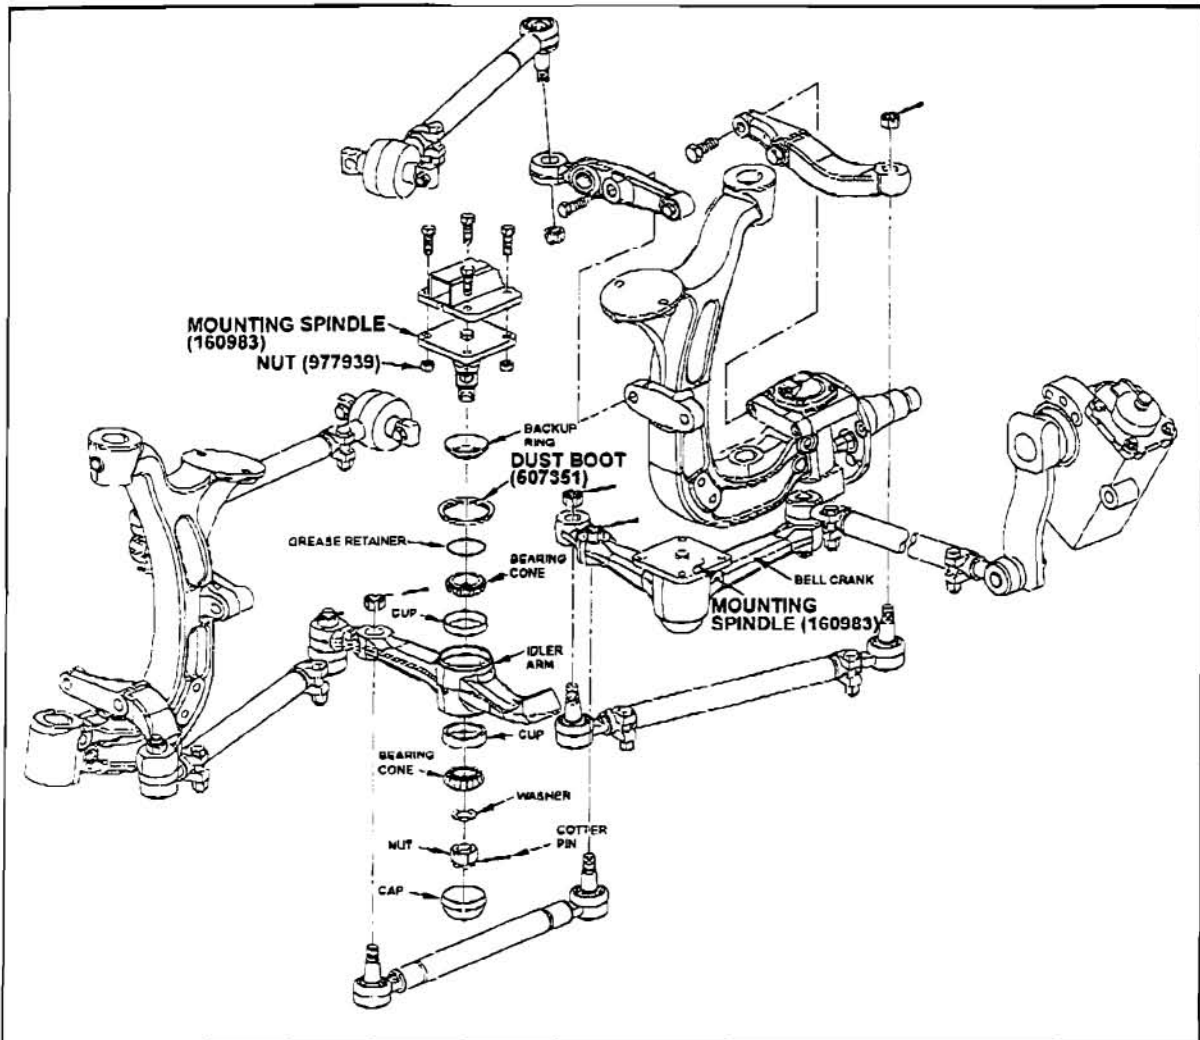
BELL CRANK AND IDLER ARM STEERING RODS ARRANGEMENT
